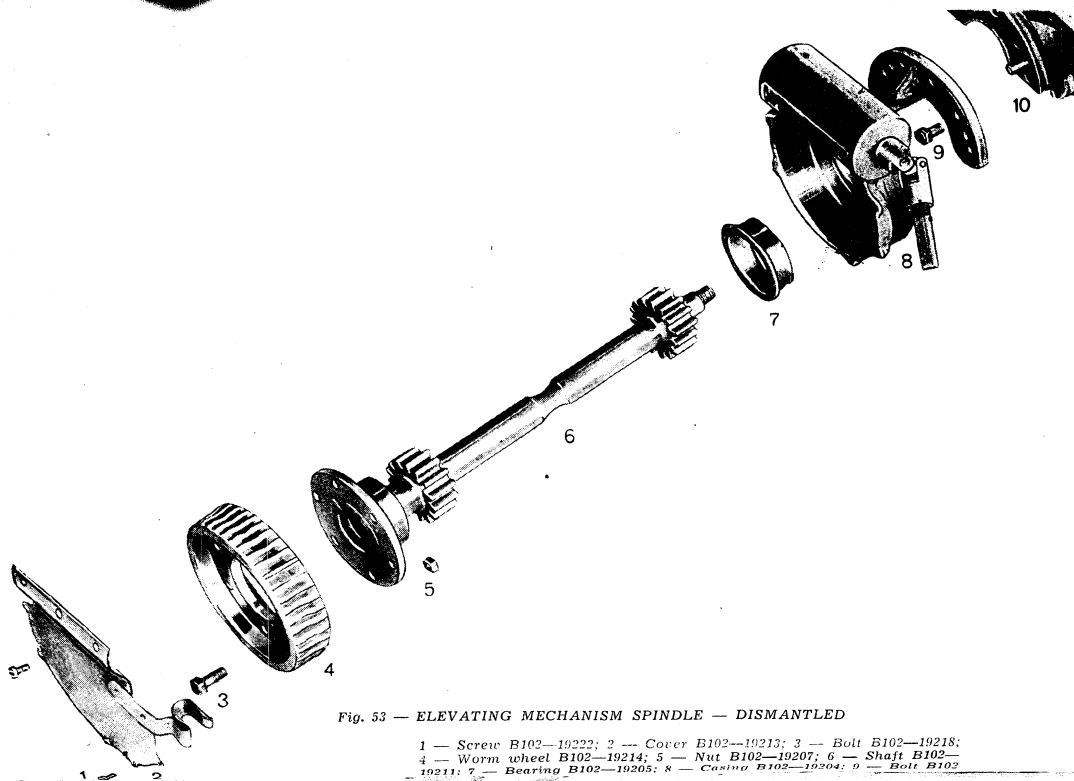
ELEVATING MECHANISM SPINDLE — DISMANTLED
